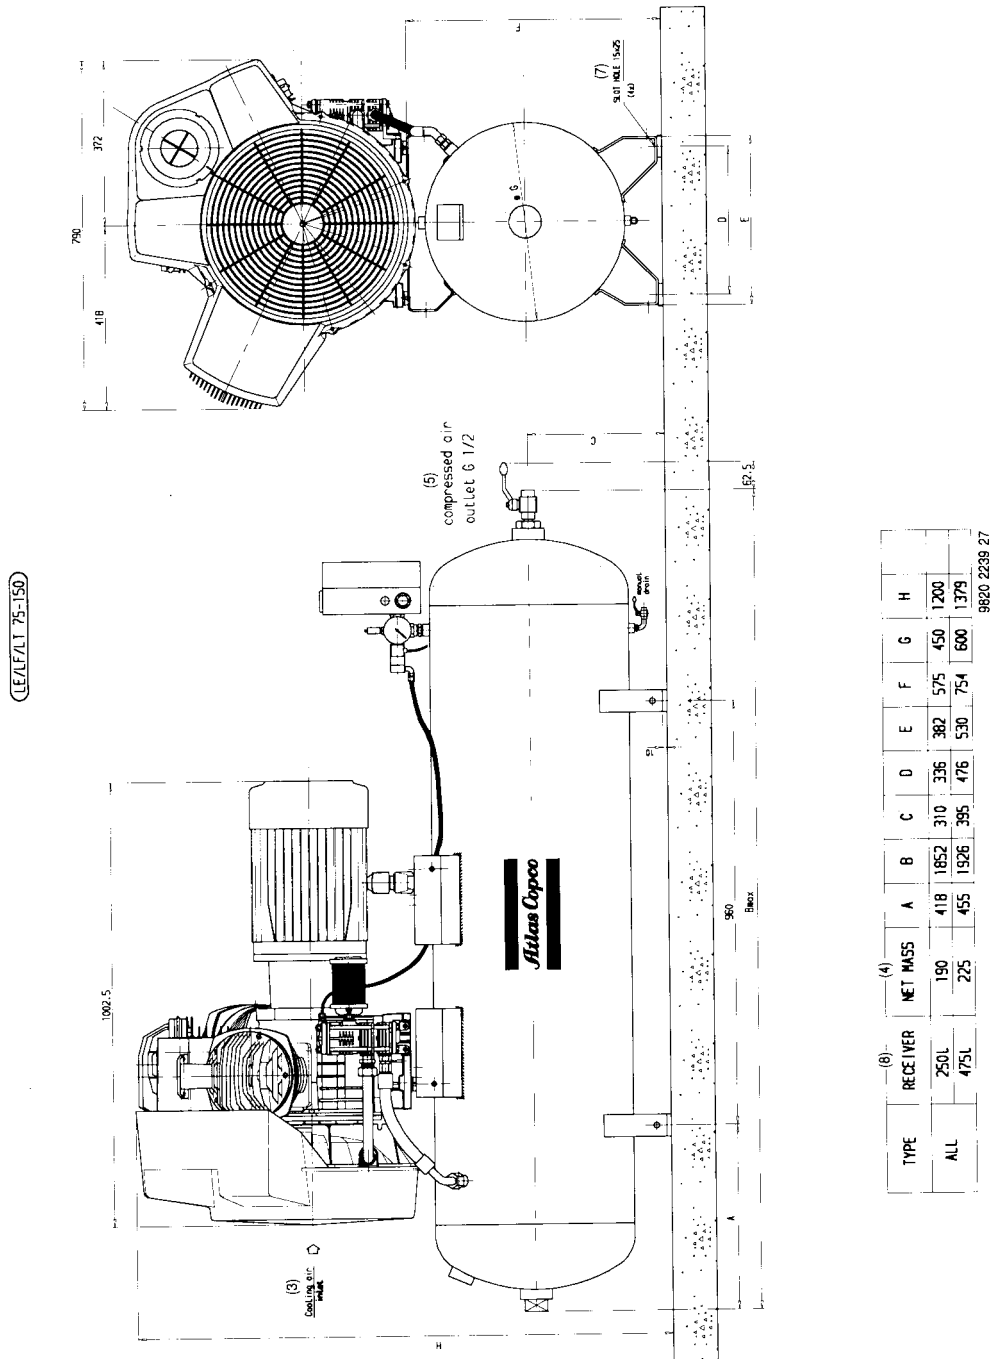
Dimension drawing, LE/LT75 up to -150 and LF75 Complete Unit (horizontal 250/475 I receiver)
